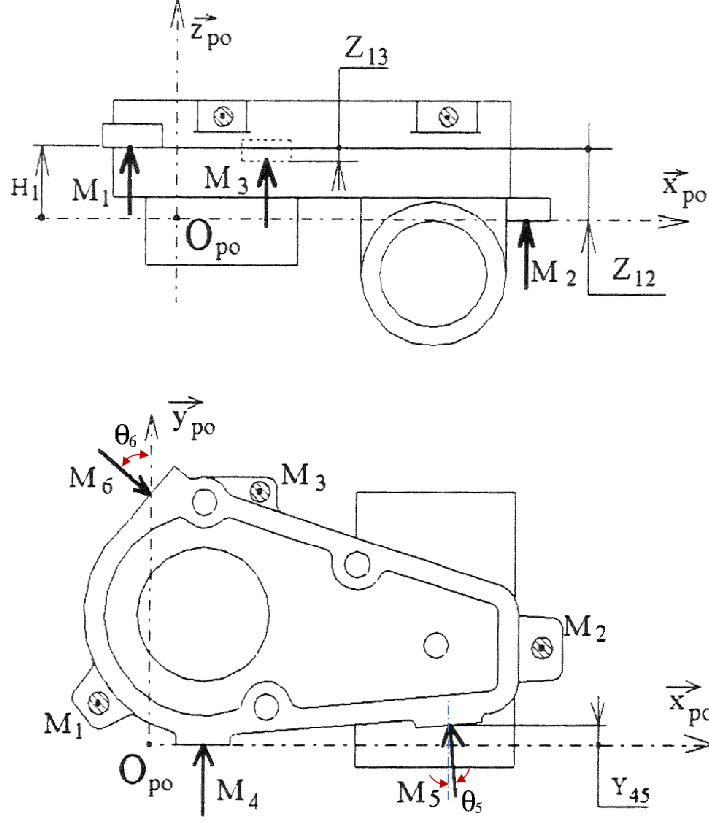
Isometric views of workpiece locating (Méry, 1997)
